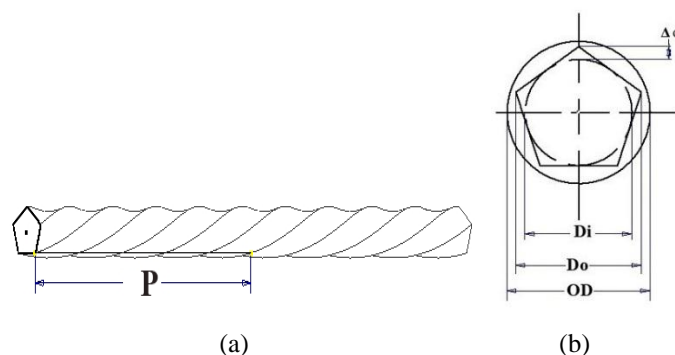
Geometry of pentagon spiral pipe: (a) Side view of pipe hollow; (b) Front view of pipe hollow
